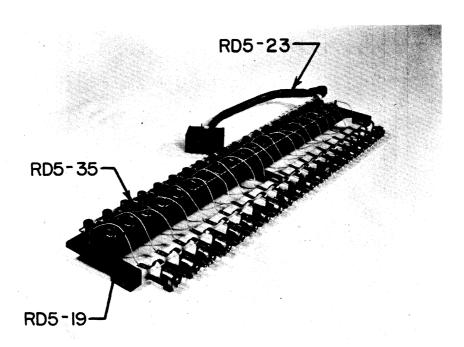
Bottom view of the G-6 lamp holder for the impact tester.
